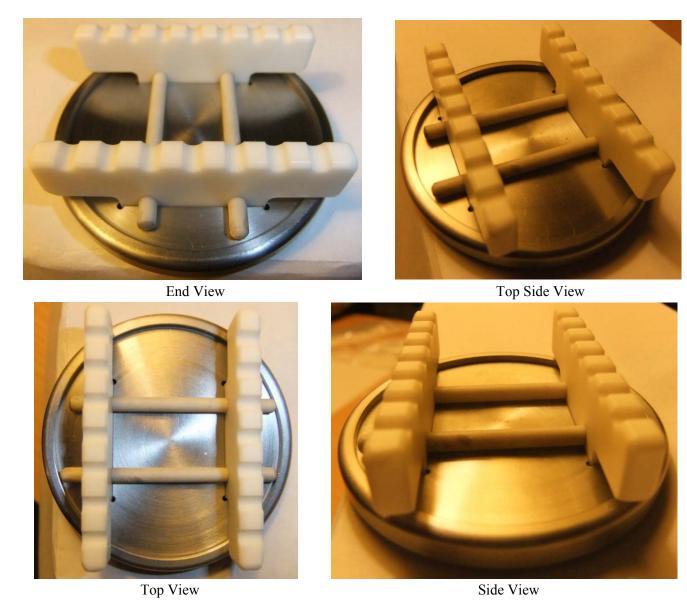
, Un Capped Ceramic Specimen Elevation Seven One Quarter Inch Spaced Eighth Inch Slot T Stands
